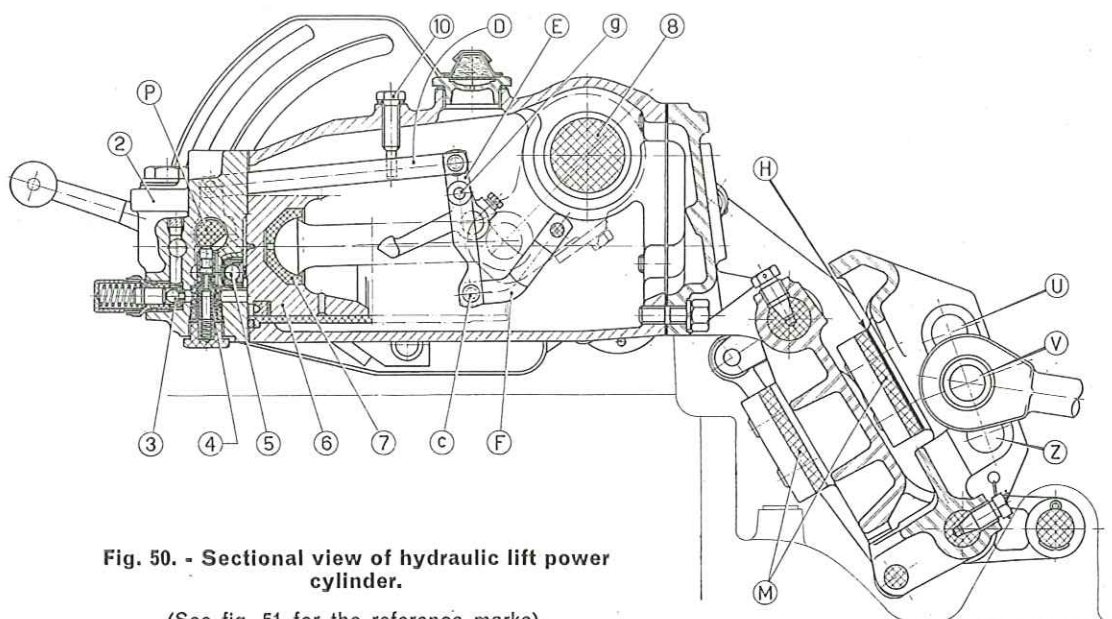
Sectional view of hydraulic lift power cylinder.
